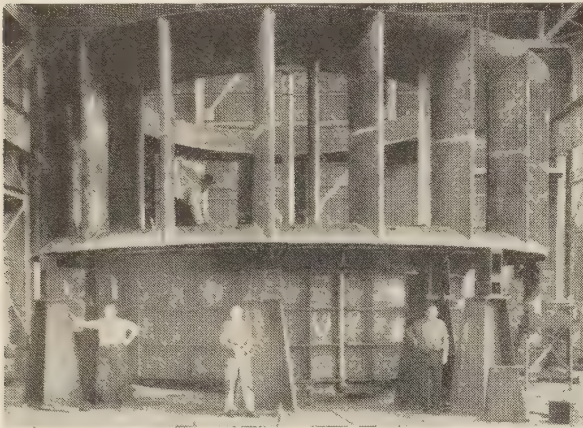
WELDED SPEED RING; GUNTERVILLE PROJECT
